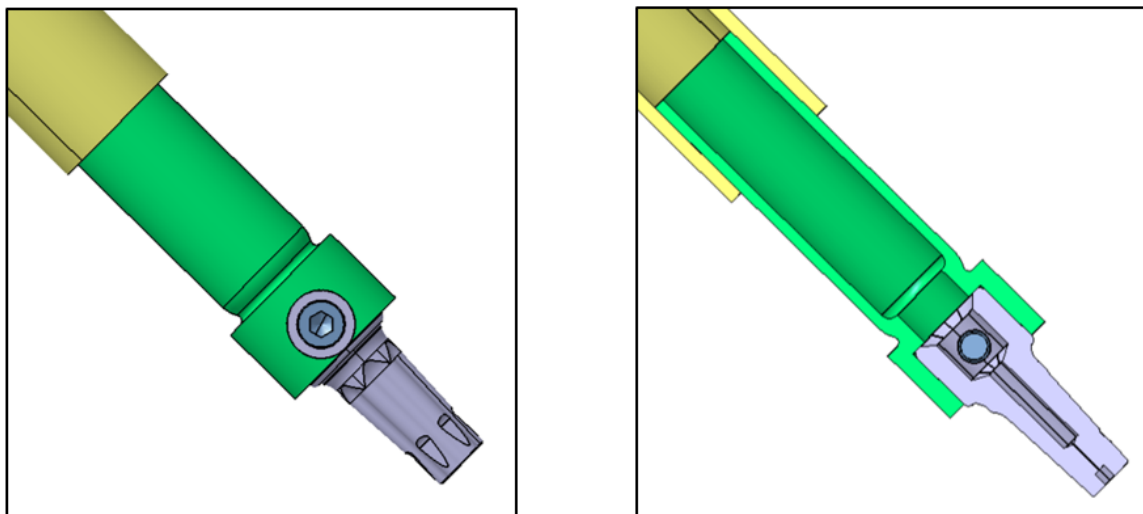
SC19 Side (left) and sectional view (right) of modified steering column - Solution 3
